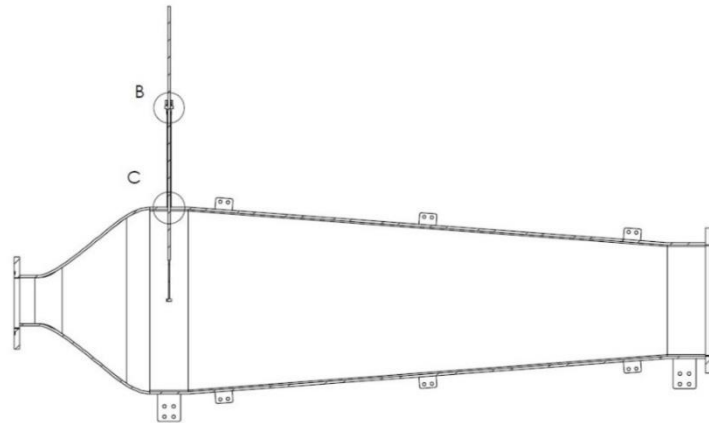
, the Kiel probe mounted on the plenum in a traversing mode
